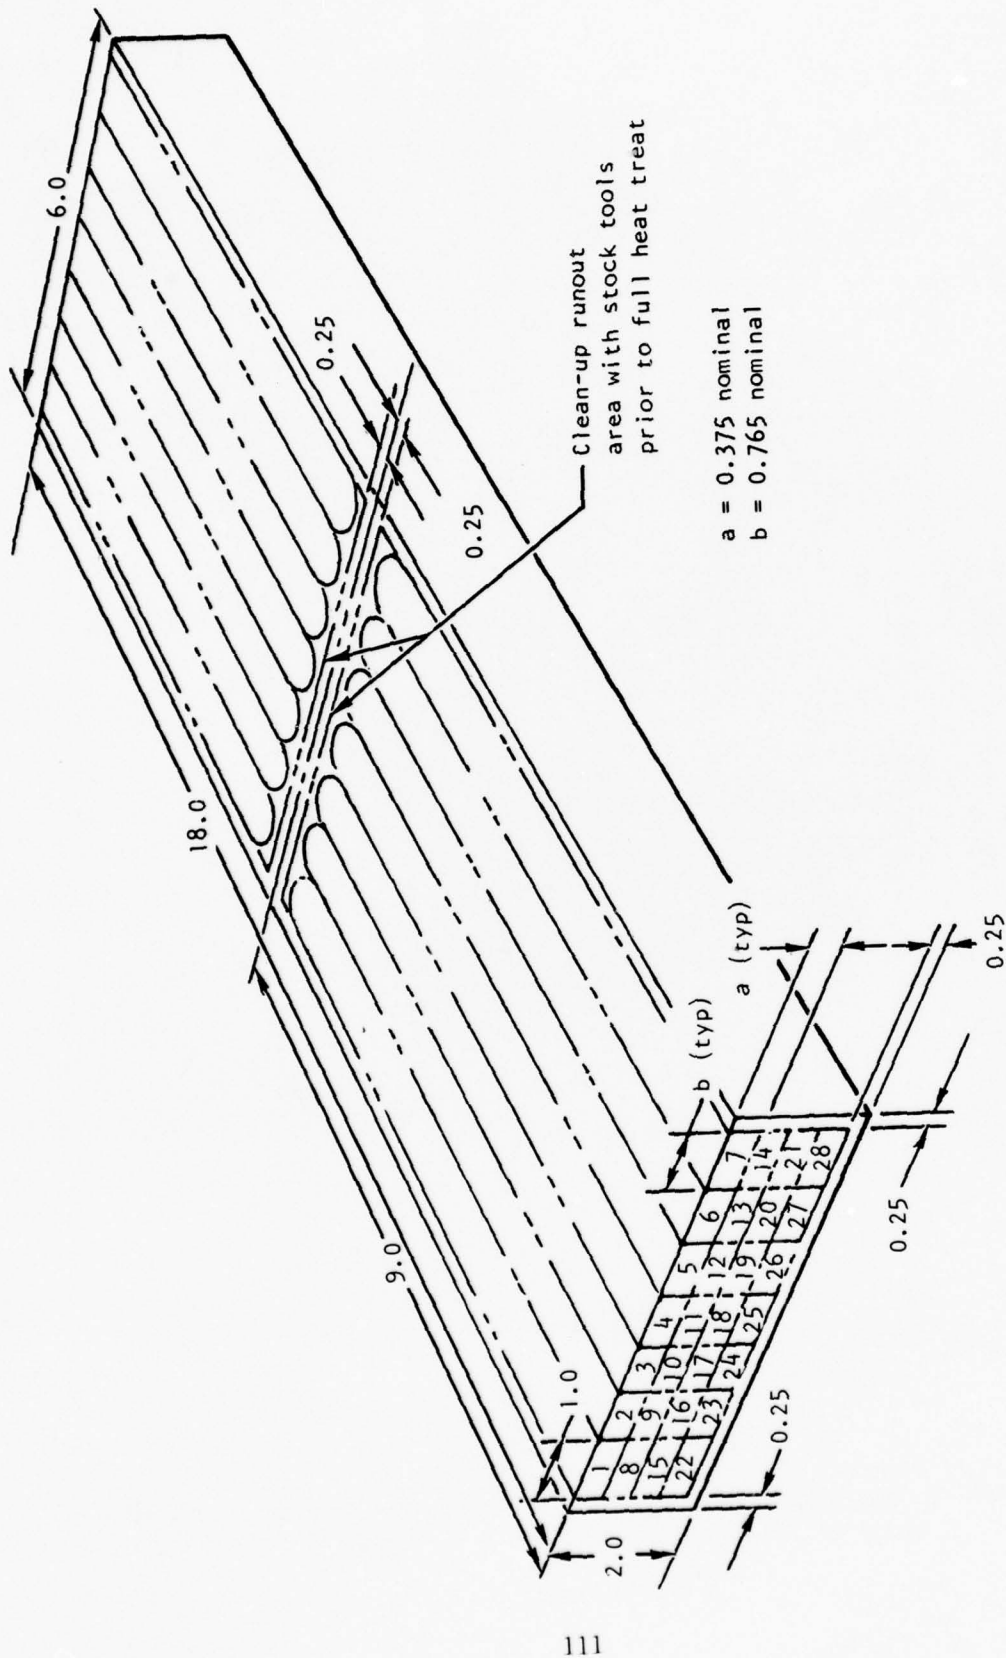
Sequence of cuts for phase III rough machining of end mill test blanks.
